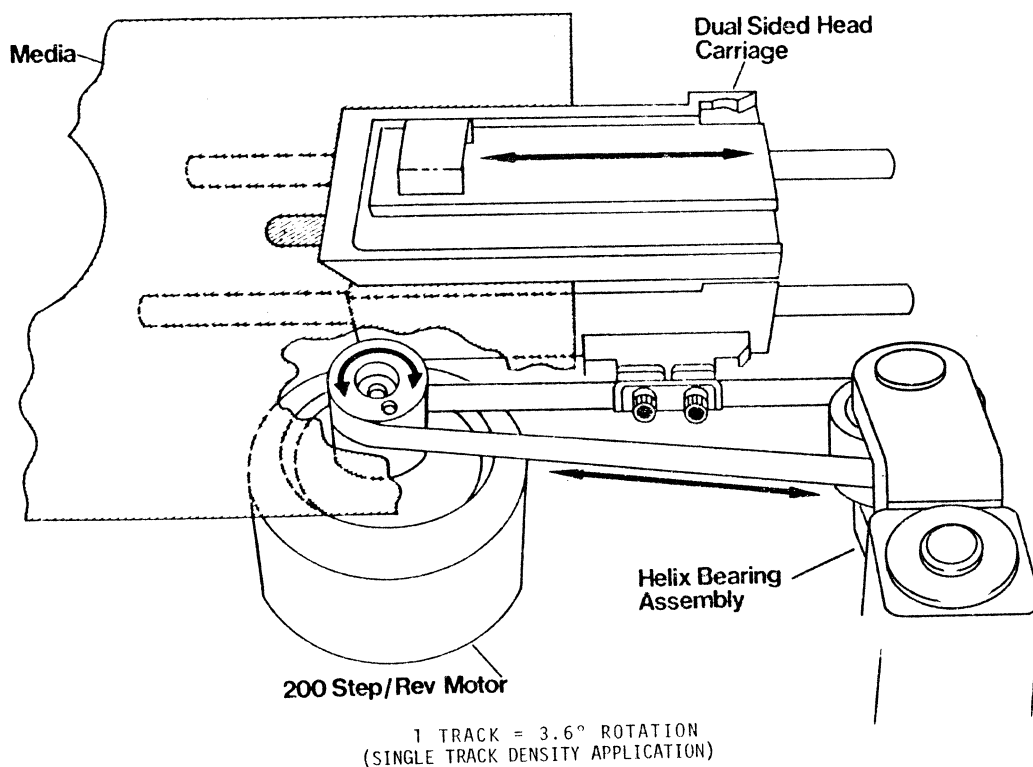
HEAD POSITIONER SUBASSEMBLY
